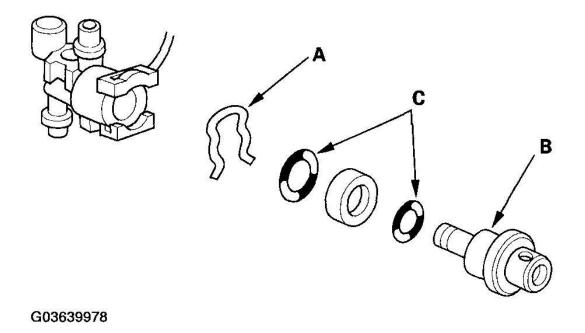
Removing Clip Courtesy of AMERICAN HONDA MOTOR CO., INC.
